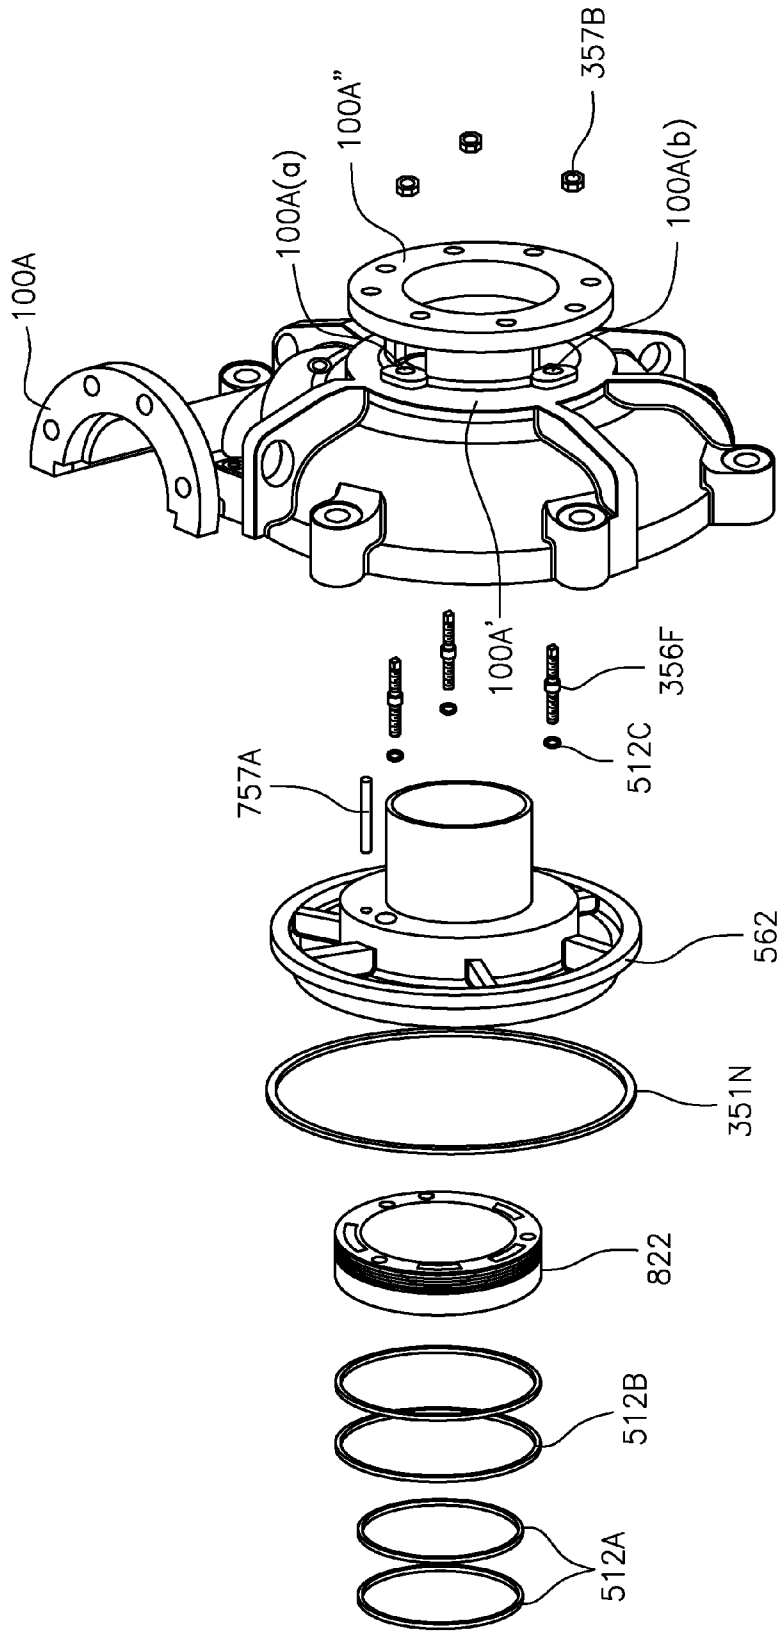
Portion of Liquid End Assembly Showing Parts of Interest
